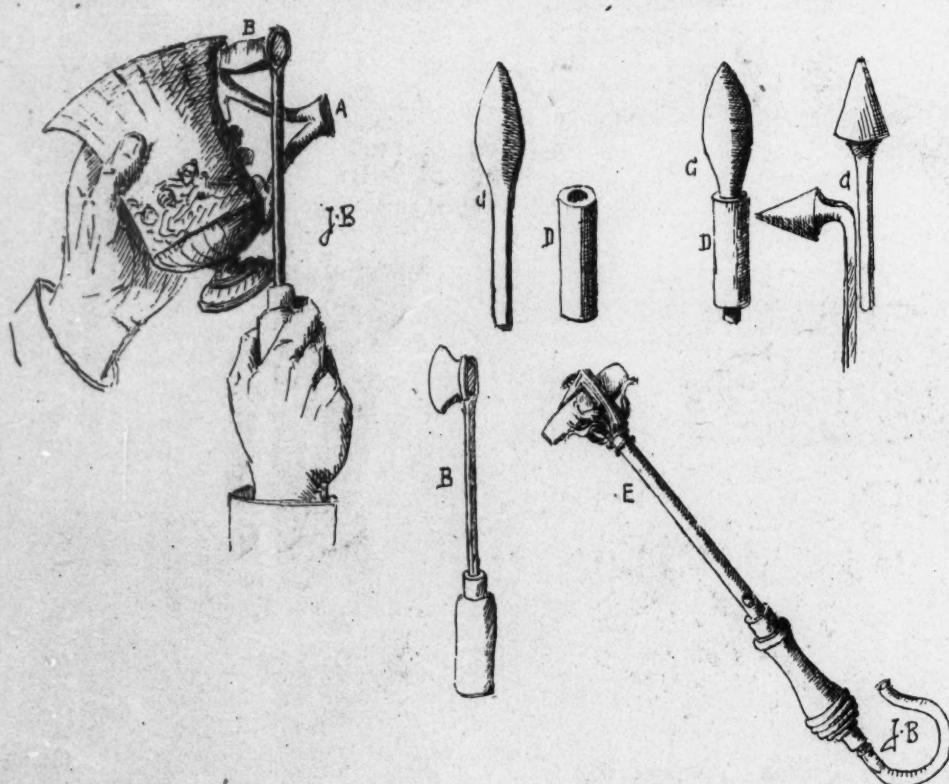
Different kinds of soldering irons. A, pewter cast after founding; BB, soldering irons in copper; CCC, soldering irons in iron; D, wood handle; E, soldering iron in copper for gas heat.
